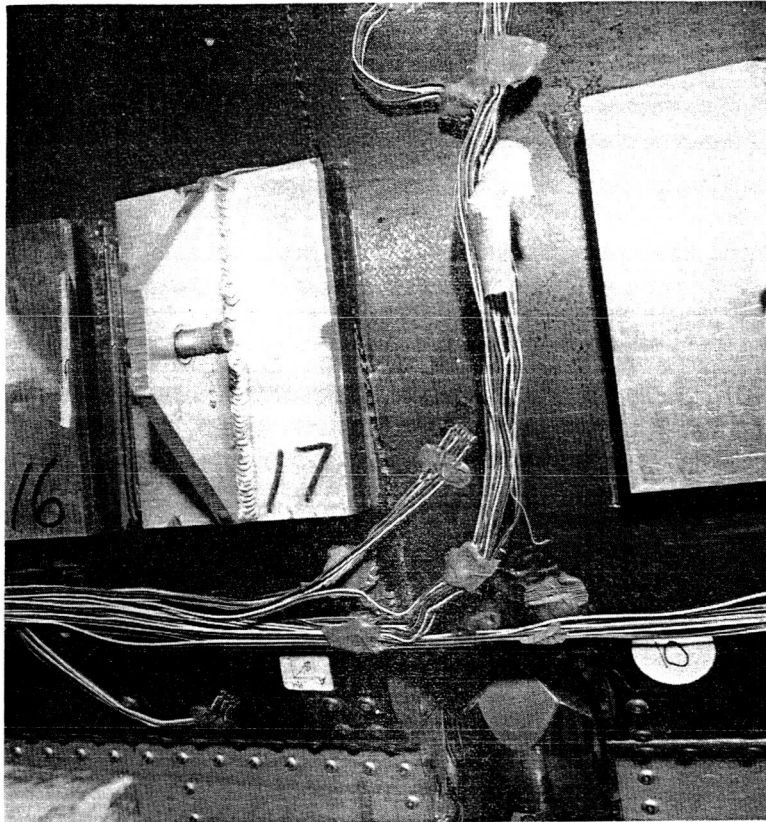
Full-Scale Test Elevator Upper Surface Failure at Station 172—Fail-Safe Test
